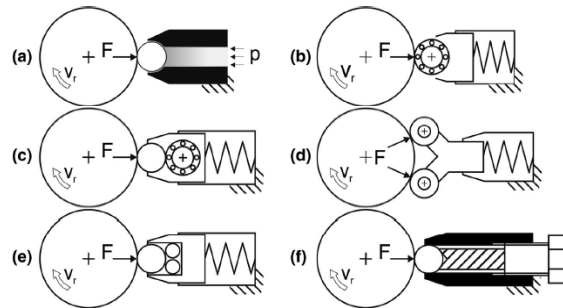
Classification of the DR tools by load definition: a) hydrostatic pressure, b) spring and bearing, c) spring, bearing and roller, d) spring and two bearings, e) spring and three balls and f) bolt and ball (Abrao, et al., 2014)
